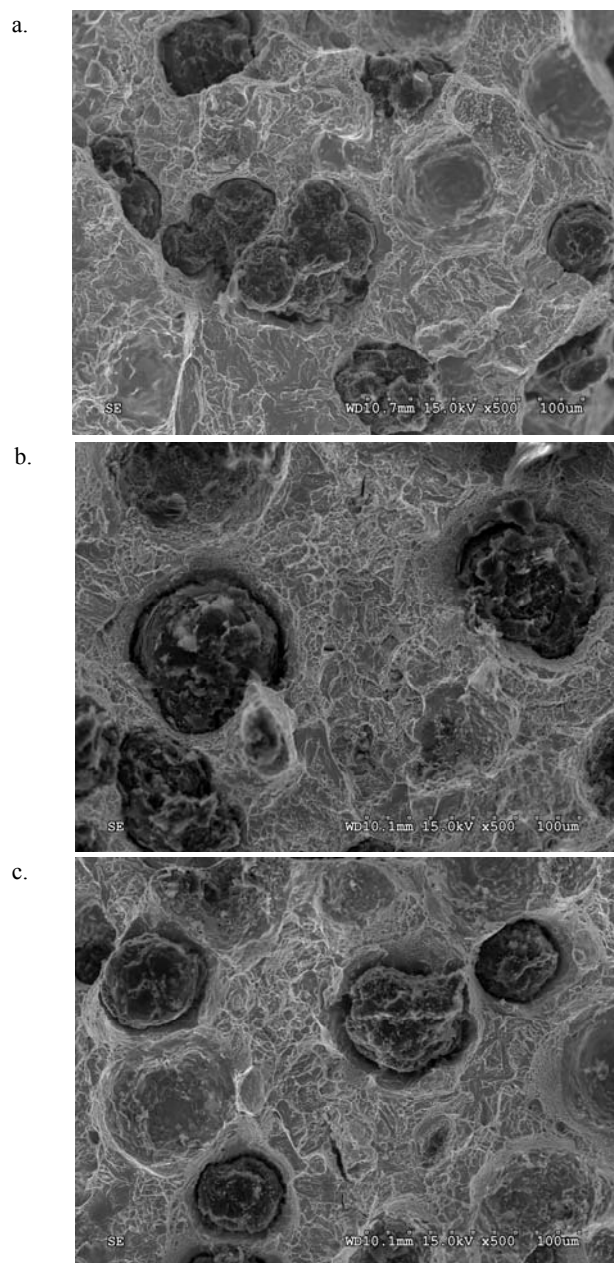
The morphology of fracture surface of ADI specimens: a – A type, b – B type and c – C type
